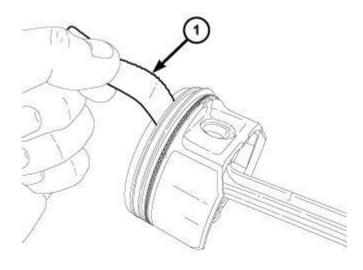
Checking Piston Ring To Groove Side Clearance Courtesy of CHRYSLER GROUP, LLC
